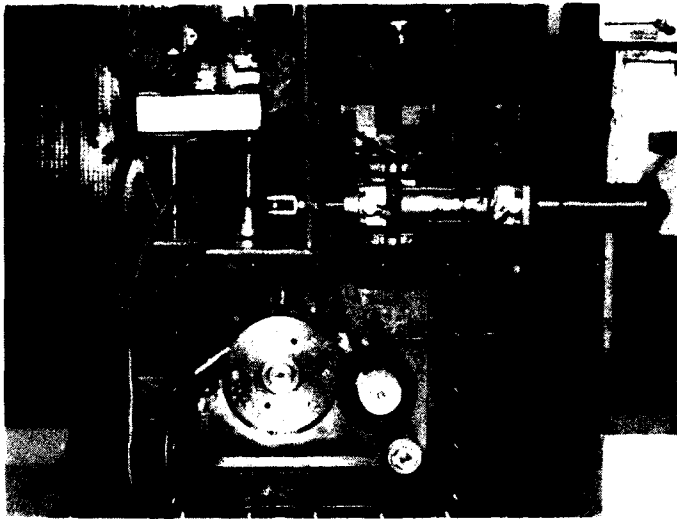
Equipment developed for deposition of weld metal against the copper wheel.
